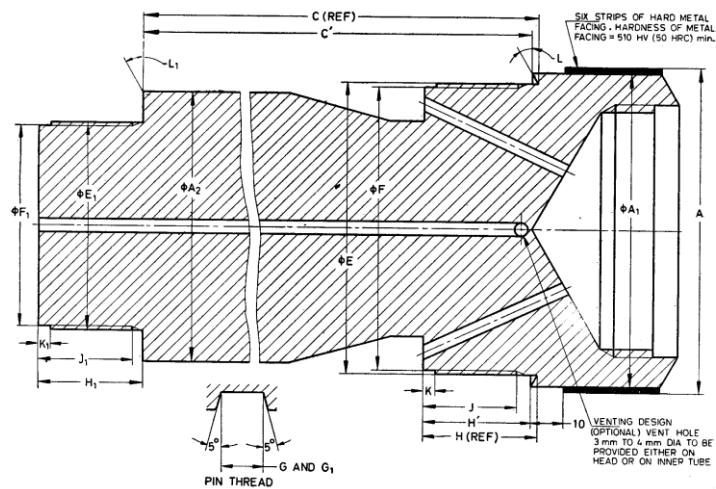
'WF' DESIGN DOUBLE TUBE CORE BARREL — INNER TUBE
